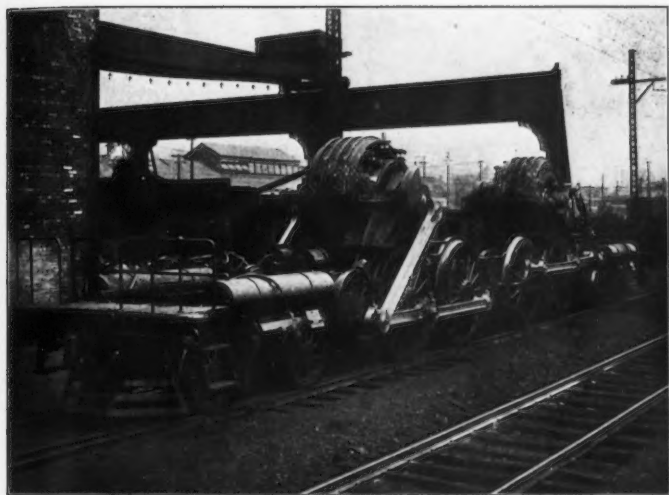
ELECTRIC LOCOMOTIVE, SHOWING MOTORS AND RUNNING GEAR.
